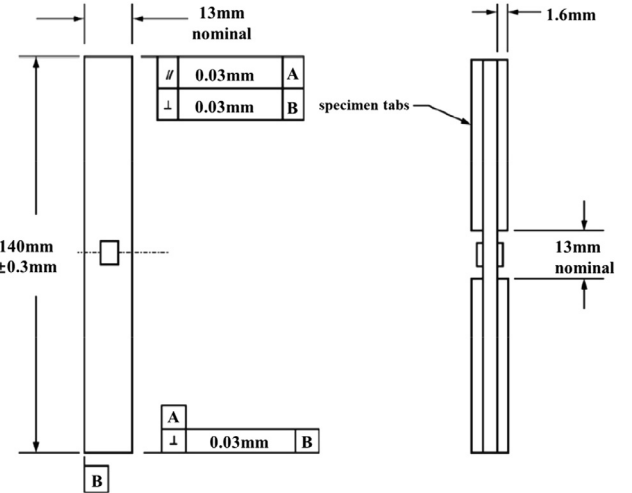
Specimen configuration in Q/6S 3071-2016 test standard.
